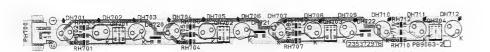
U0032 LED PC Board (Top Side)
